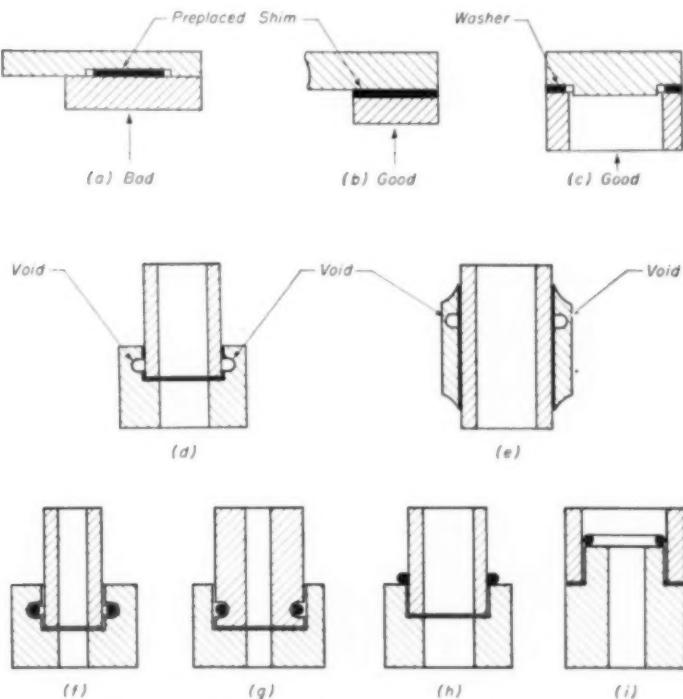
Joints Braze with Preplaced Filler Metal Forms
